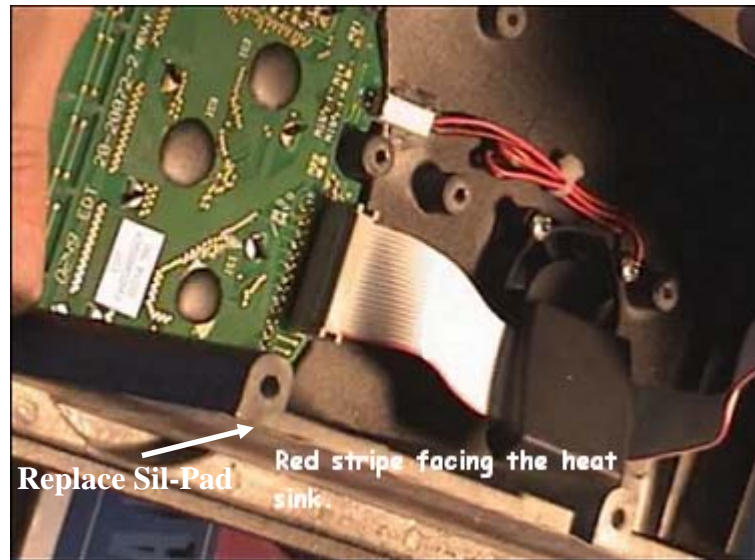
Ribbon cable's red stripe faces the heat sink wall
